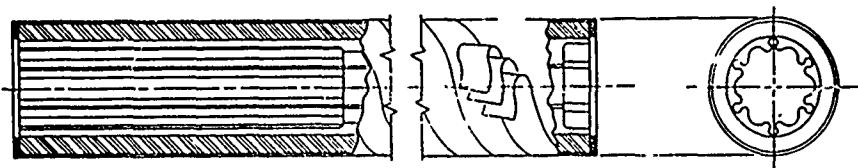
Rocket Motor Igniter Mk 195 Mod 0.
